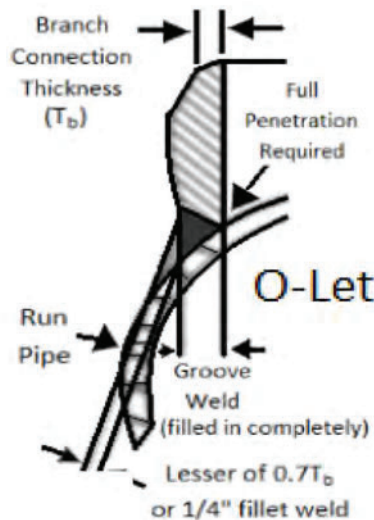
Joint detail for welding an O-Let per welding procedure specification.
